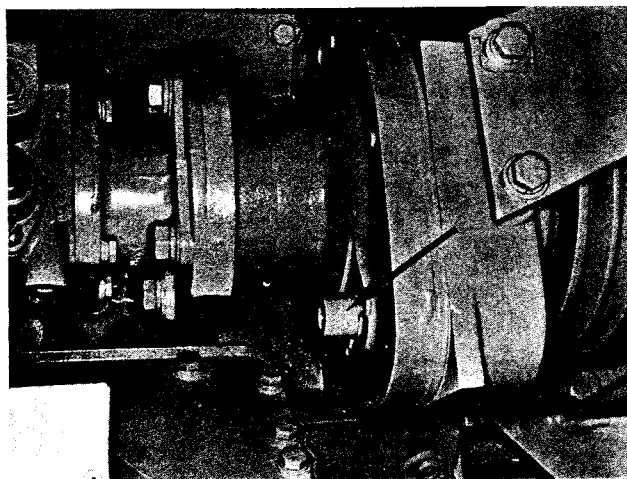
, (V51486). Engine barring arrangement — V-903
